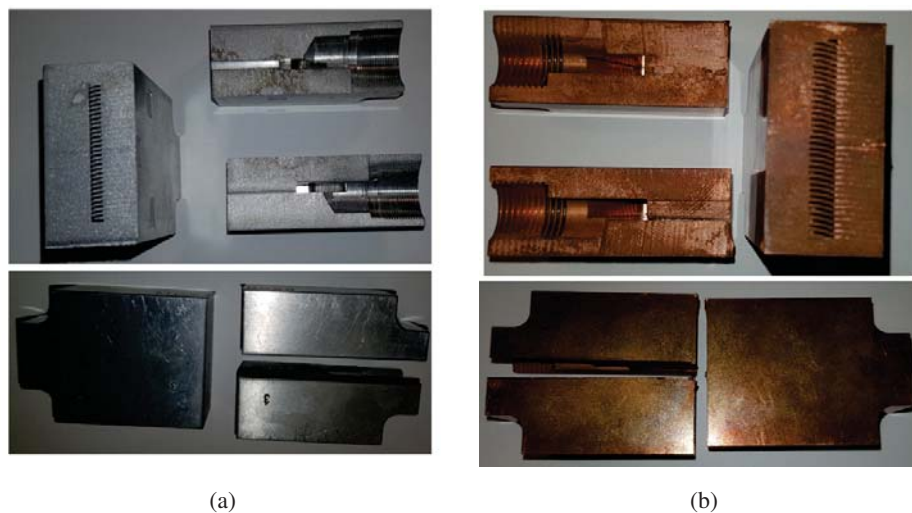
Module pieces after water jet cutting (a) Module 1 (b) Module 2
